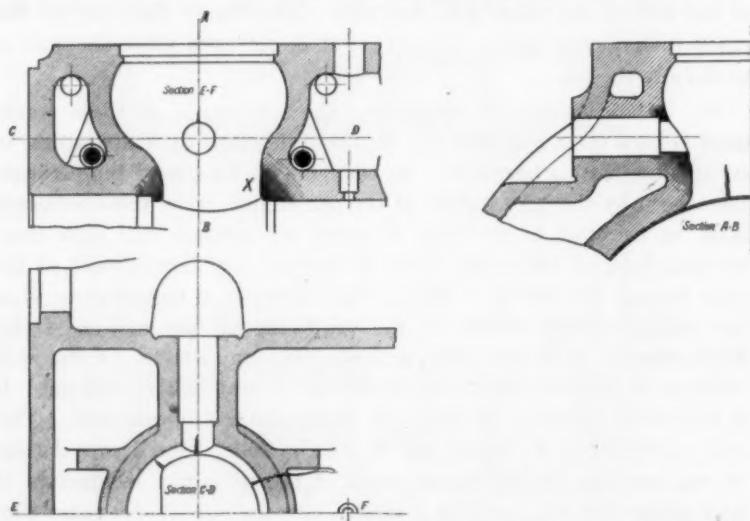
TYPICAL LOCATIONS OF FIRE CRACKS IN PLACES WHERE COOLING IS IMPEDED
